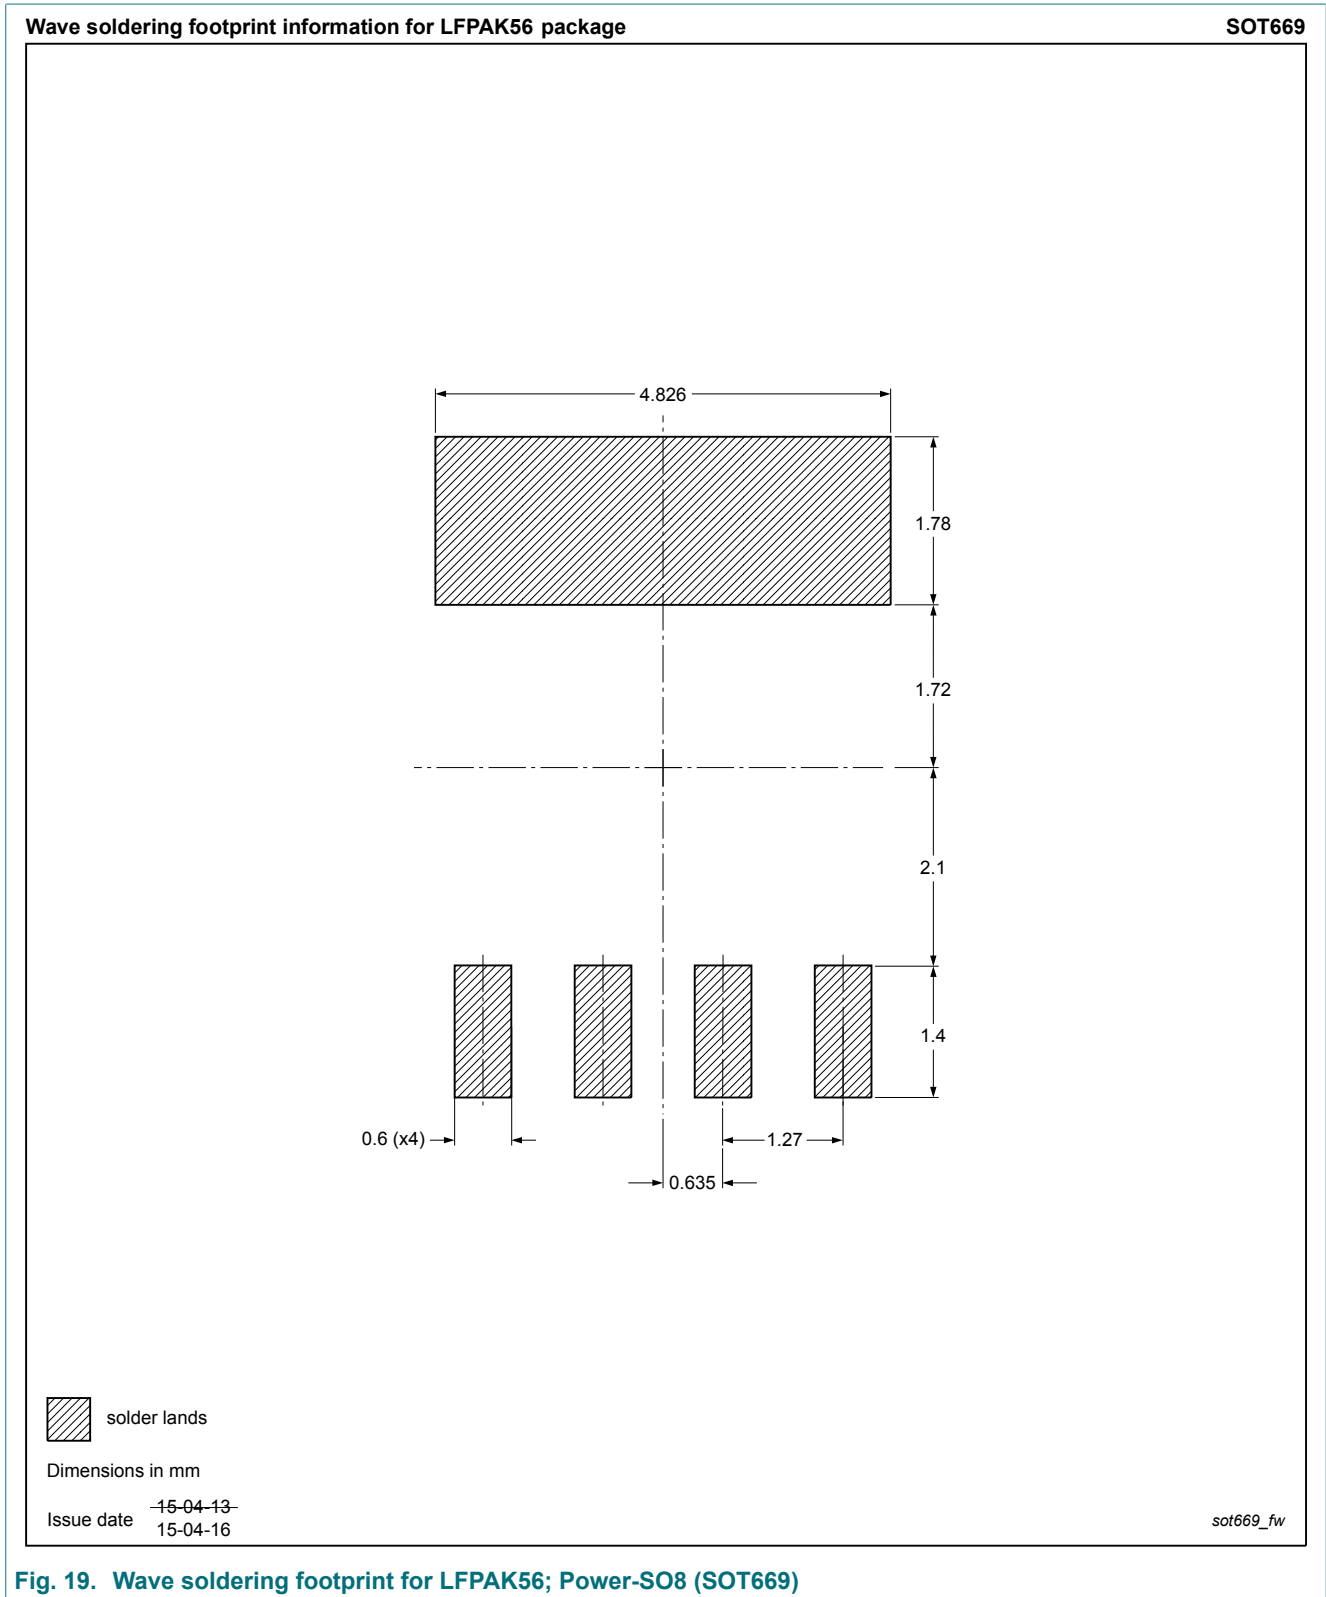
Wave soldering footprint for LPAK56; Power-SO8 (SOT669)
